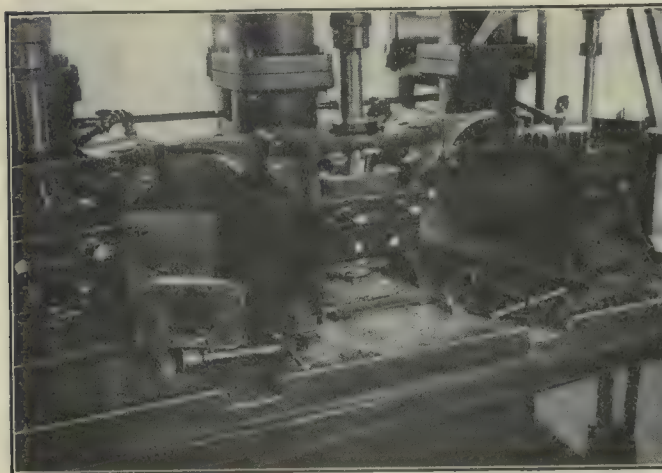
CLOSE-UP VIEW OF ONE OF THE FIXTURES
